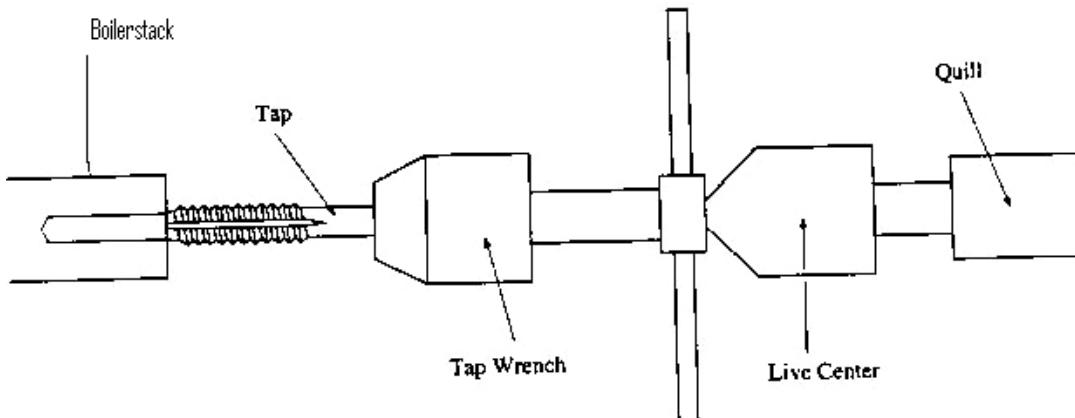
Threading the Hole in the Smoke Stack end of the Boiler stack
